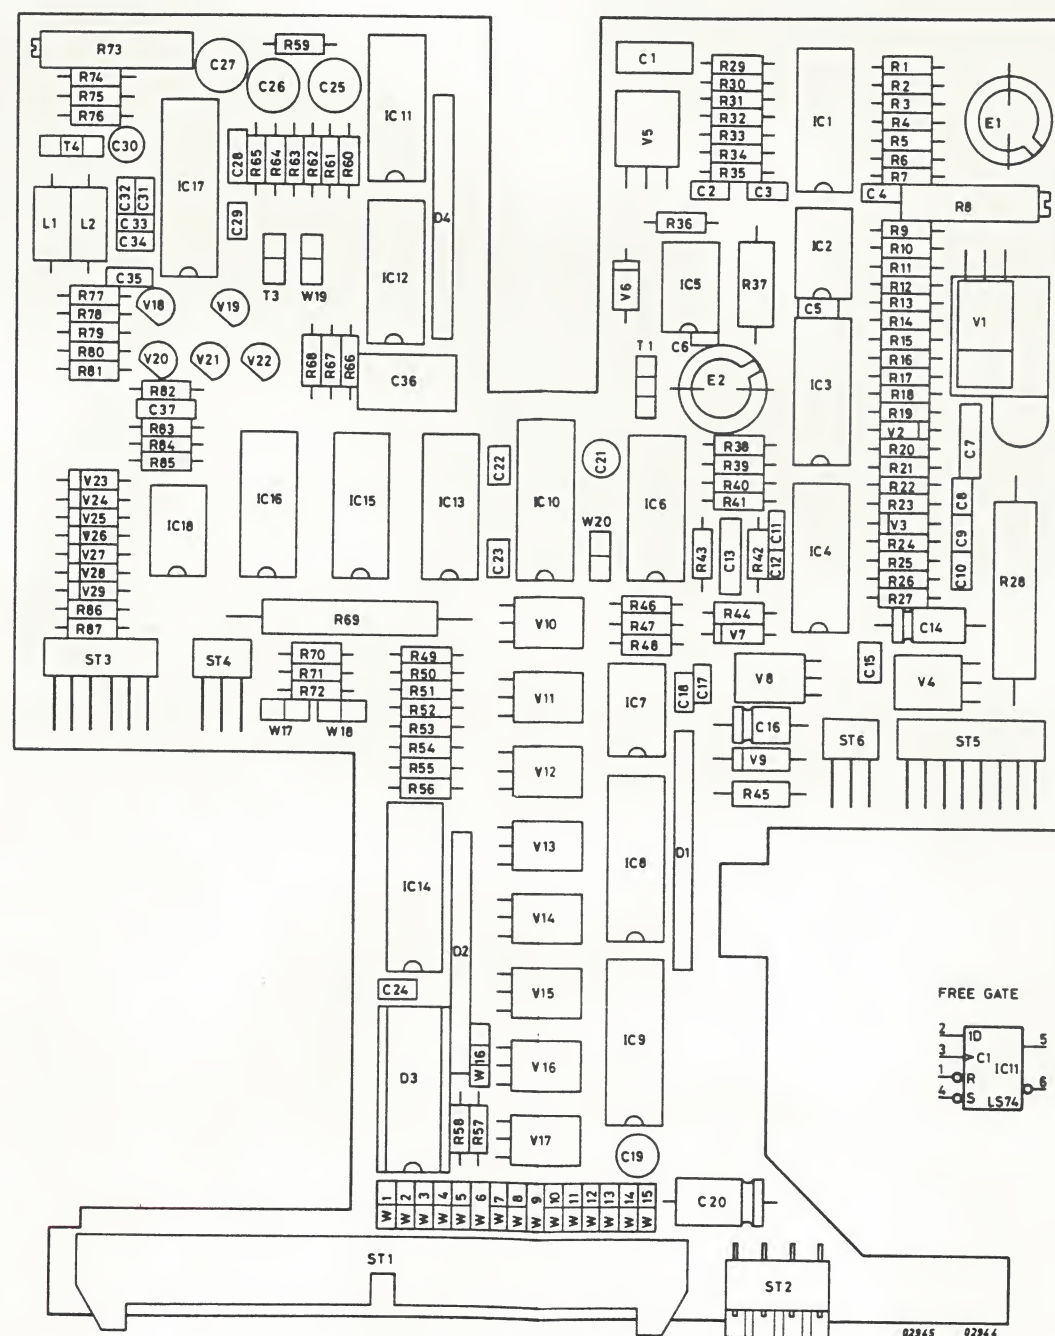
LAYOUT X3110 (PCB MFD1)
